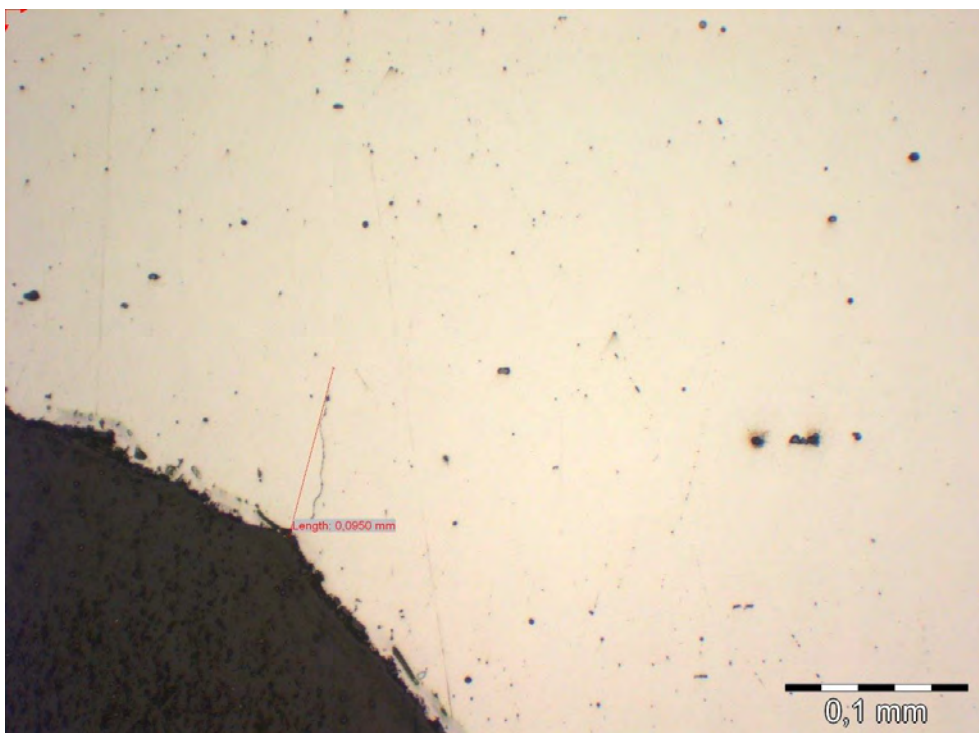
Cut six in crack at segment A, second ridge on barrel no. 14389
